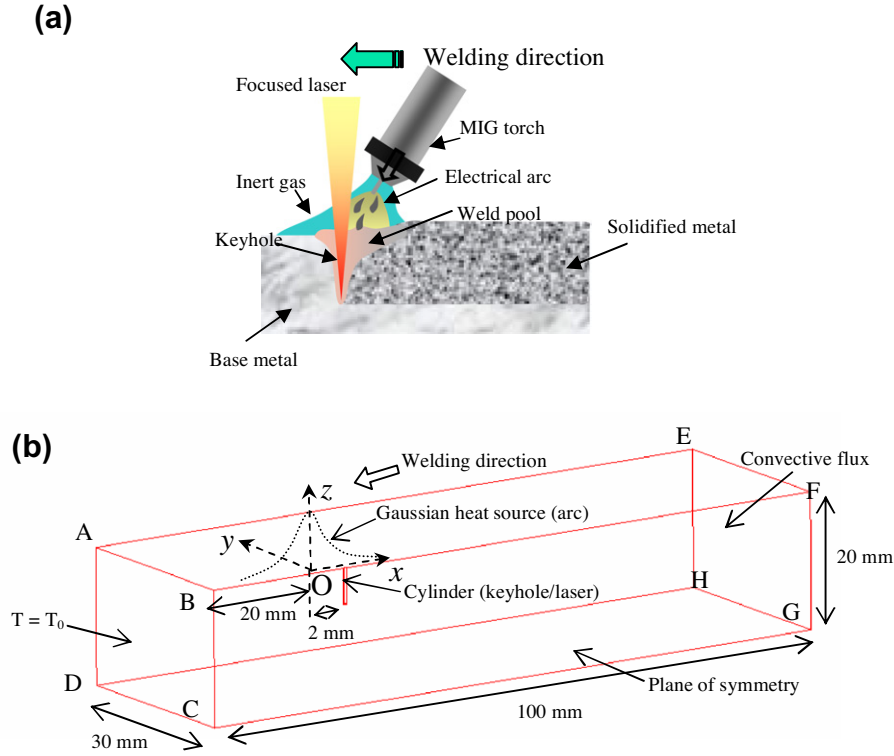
Schematic sketch of laser-MIG/MAG hybrid welding process (a) and computational domain size (b).
